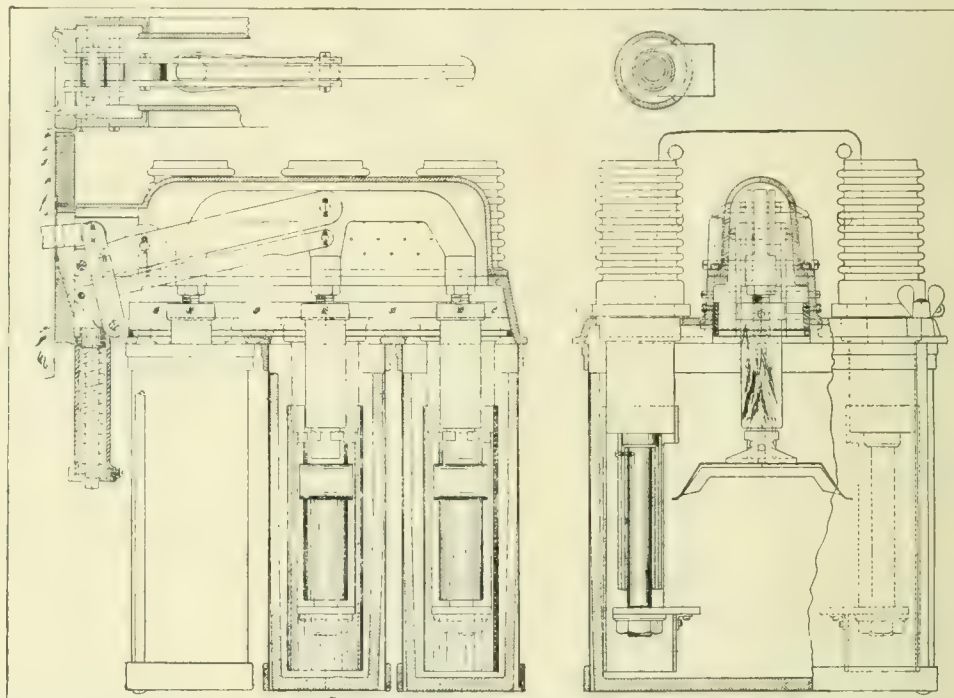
Cross-Sectional Details of LS Condit Switch.
